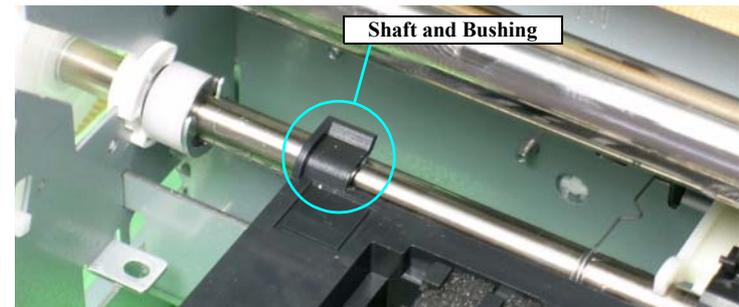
The PF Roller Shaft and the Bushing of the Front Paper Guide
